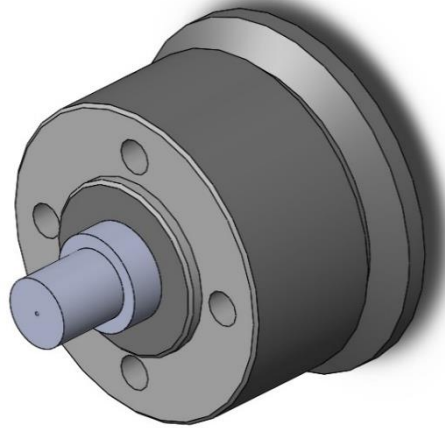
3D geometry of the extrusion die used in the extrusion process.
